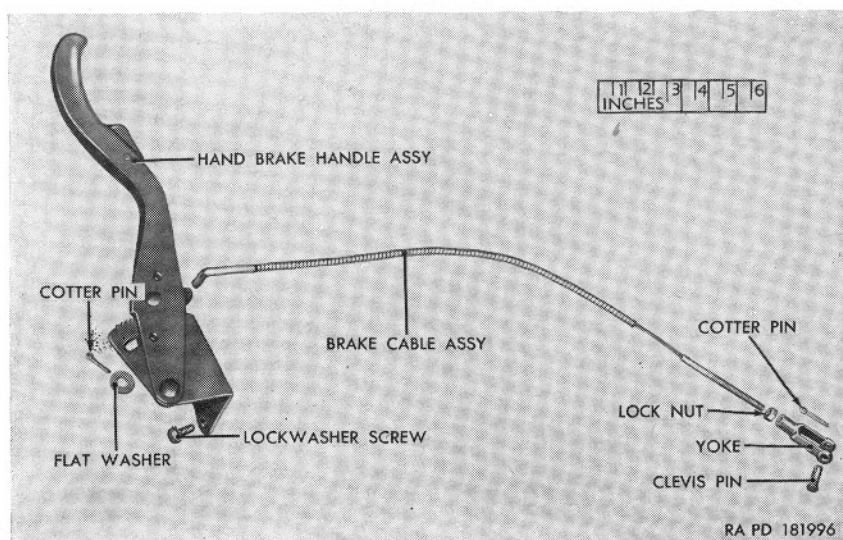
(Added) Hand Brake Assembly M170—Partially Exploded View.
